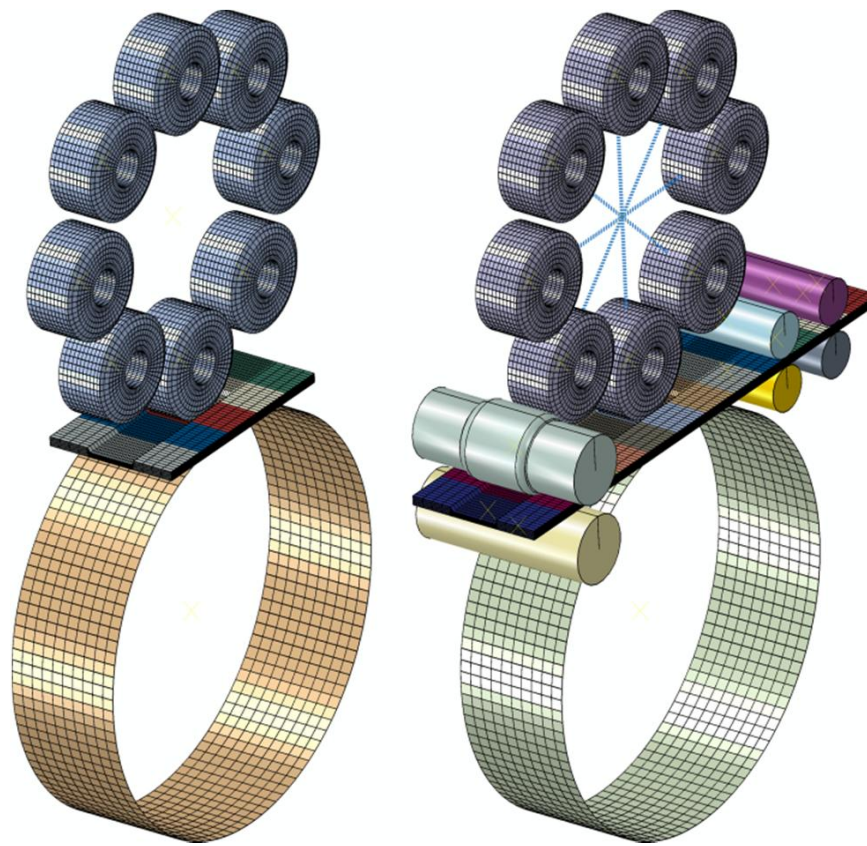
Planetary rolling mill assemblies featuring periodic media technology.
